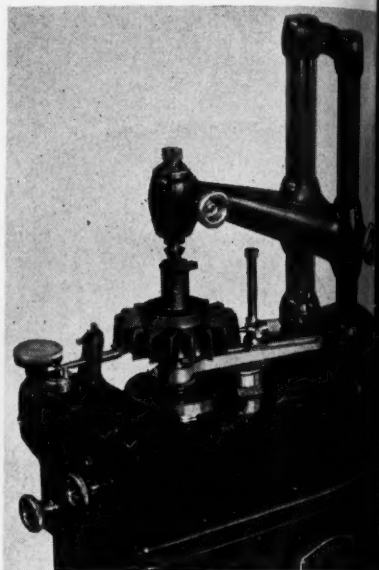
With a slightly different set-up, the machine shown in Fig. 2 can be used, as shown here, to check normal pitch and tooth spacing.
